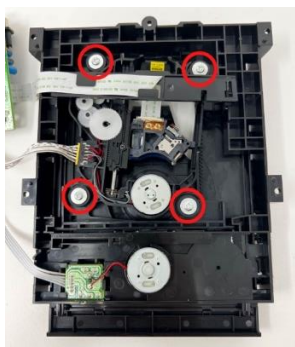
Take out four screws connecting the Laser and Lens Assembly
